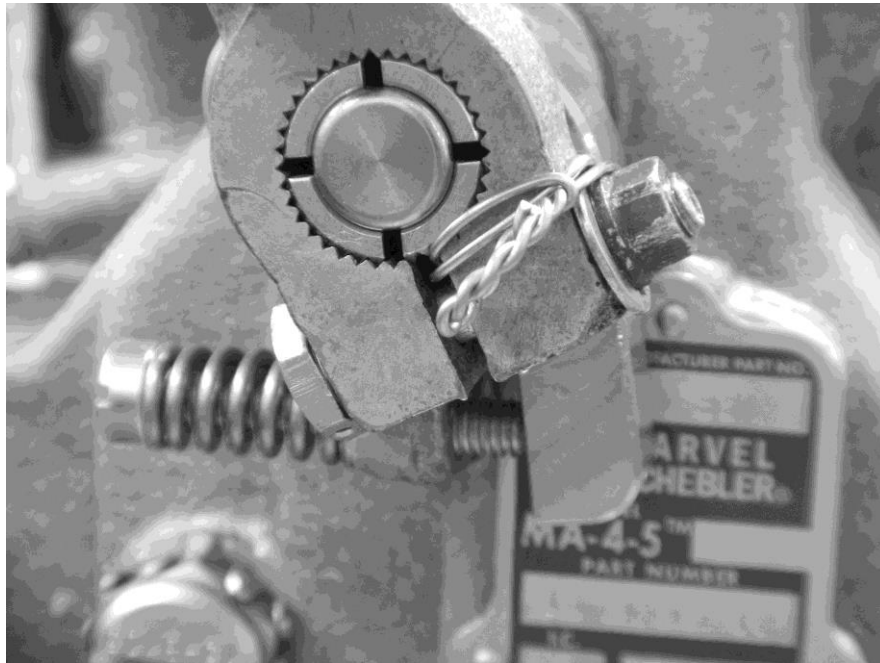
Safety Wiring of Throttle Arm to Carburetor Stop Arm
